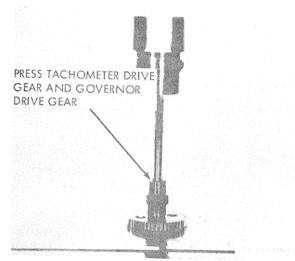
Tachometer drive gear and governor drive gear being pressed.
